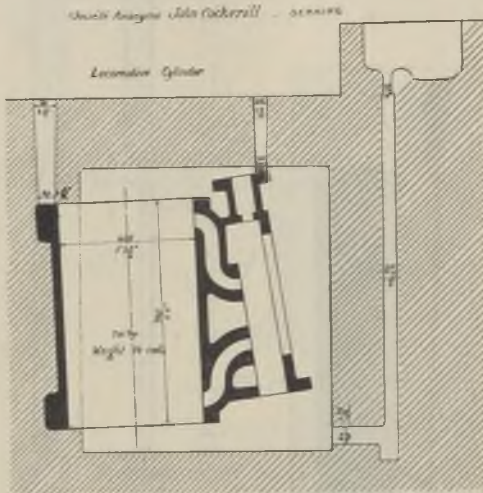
A 14-CWT. LOCOMOTIVE CYLINDER CAST WITH A $1\frac{3}{8}$ -IN. RUNNER, ENLARGED ON ENTERING MOULD TO $1\frac{15}{16}$ IN.
